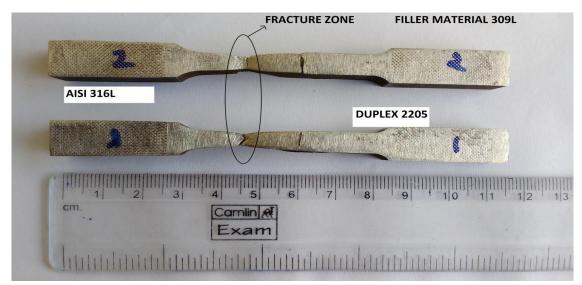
Tensile failure of weld joint fabricated with ER 309L filler wire
